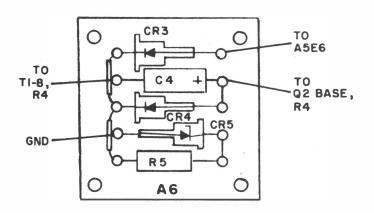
DC-to-DC Converter Board (3A2A5A2), Component Location
